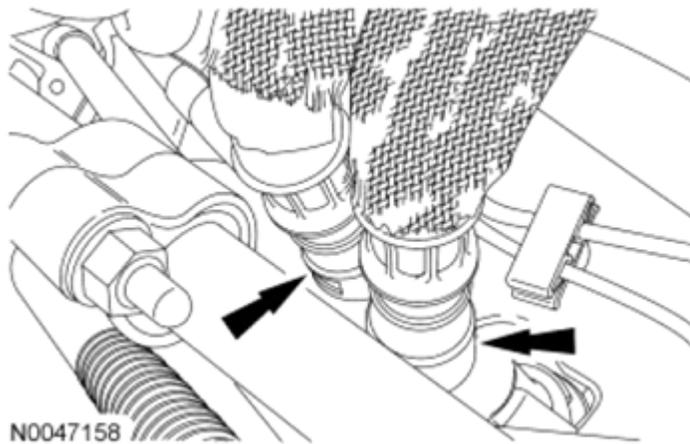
Locating Auxiliary Heat Coolant Hoses
